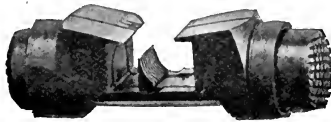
SEPARATE VIEW OF COMPLETE SLIDE AND SPRING CLUTCH.
